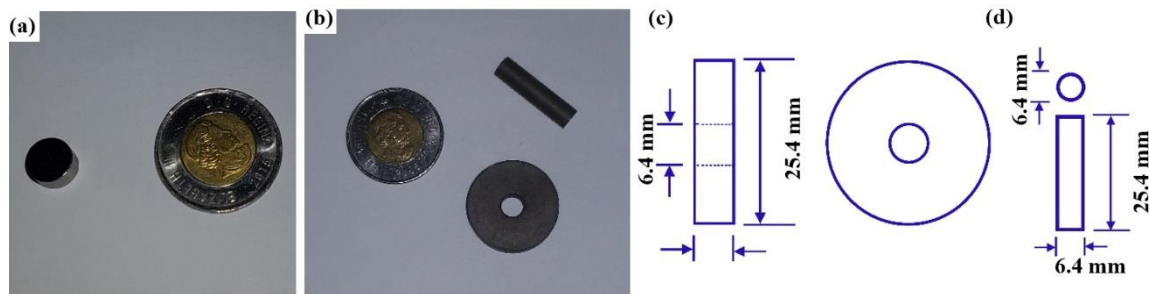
Inconel[®] 718 samples (a) button sample; (b) disc and pin wear test sample; (c) disc dimensions; (d) pin dimensions.
